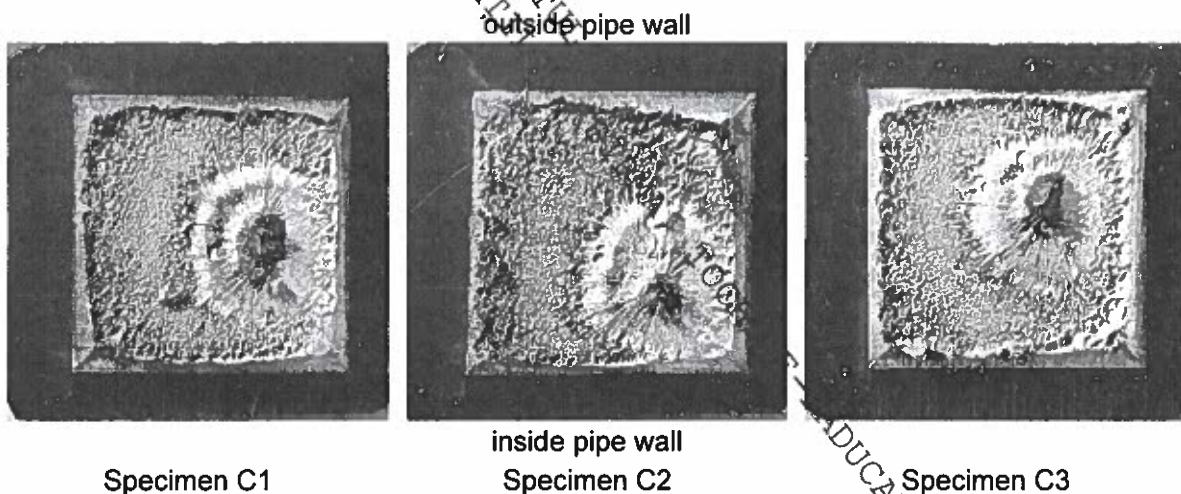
Top view of the fracture surfaces (one half of each specimen)
